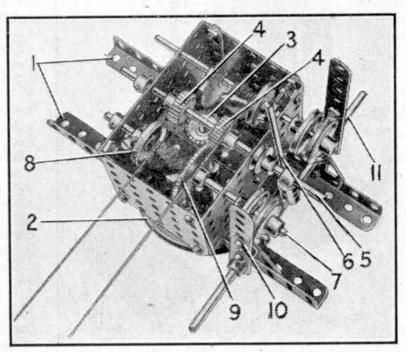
A simple gear-box suitable for transmitting a drive to the chassis of a mobile crane and also operating the hoisting movements.
